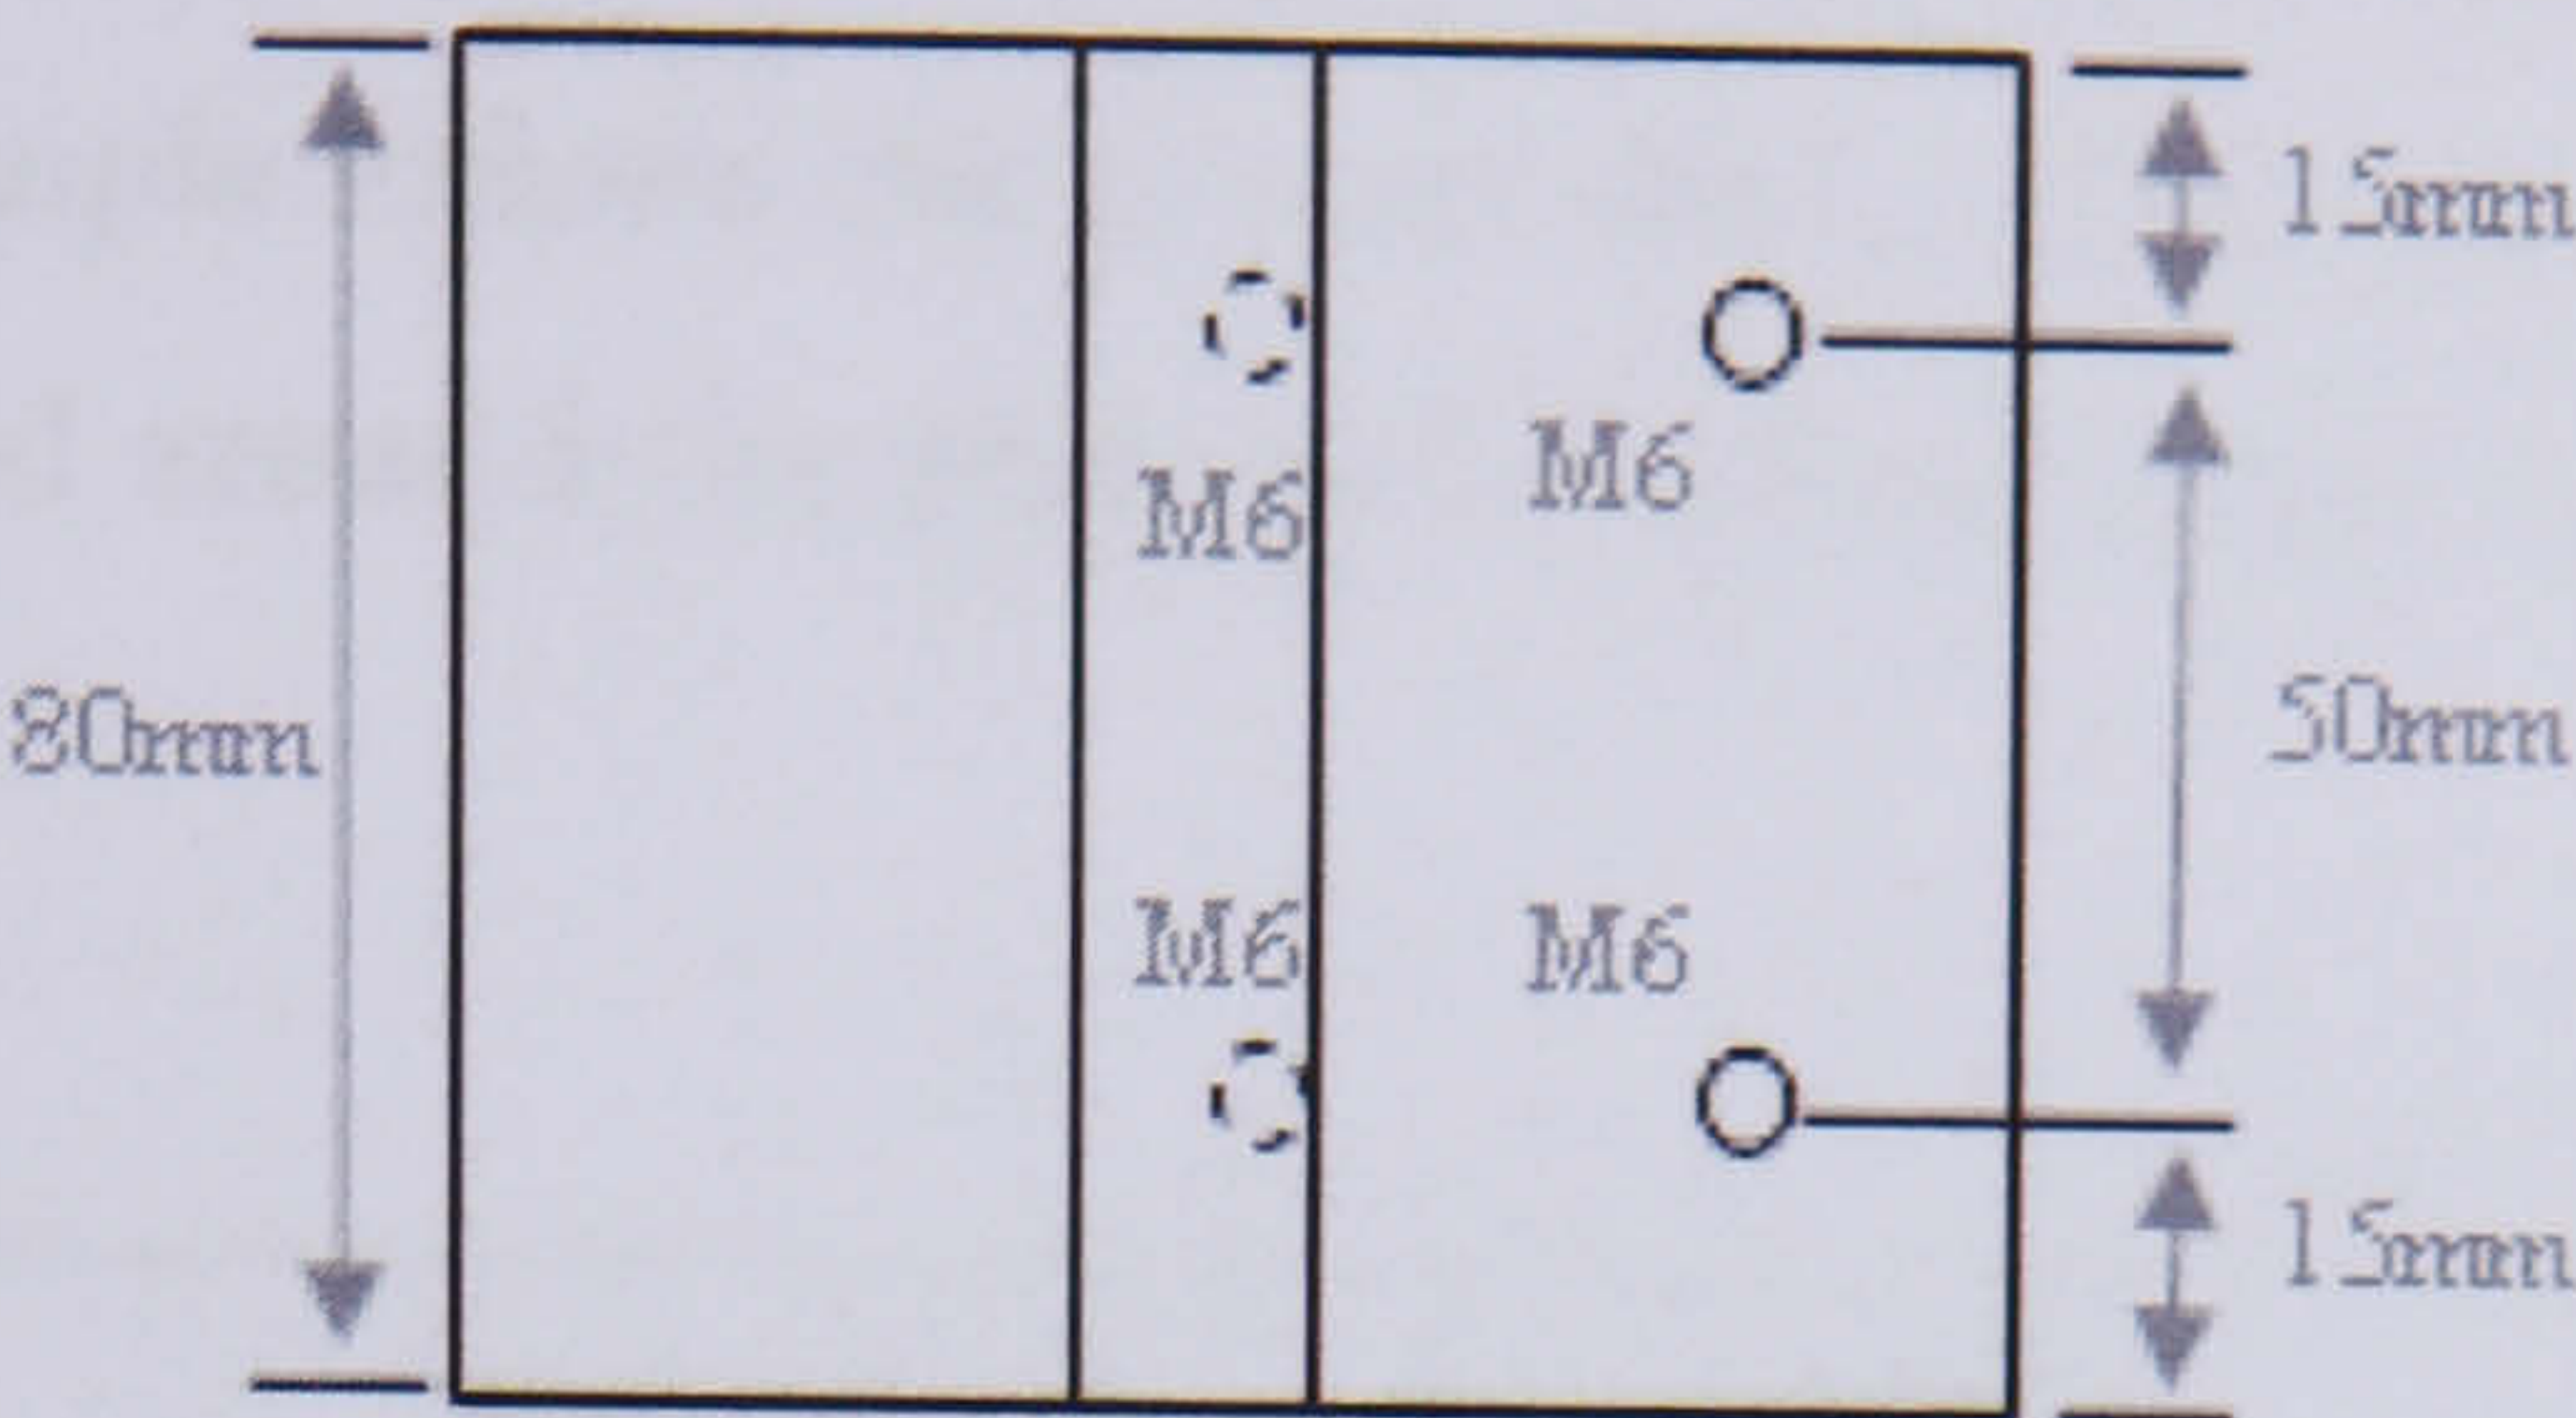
Plan view dimensions of the roof component mount for the APS camera.
